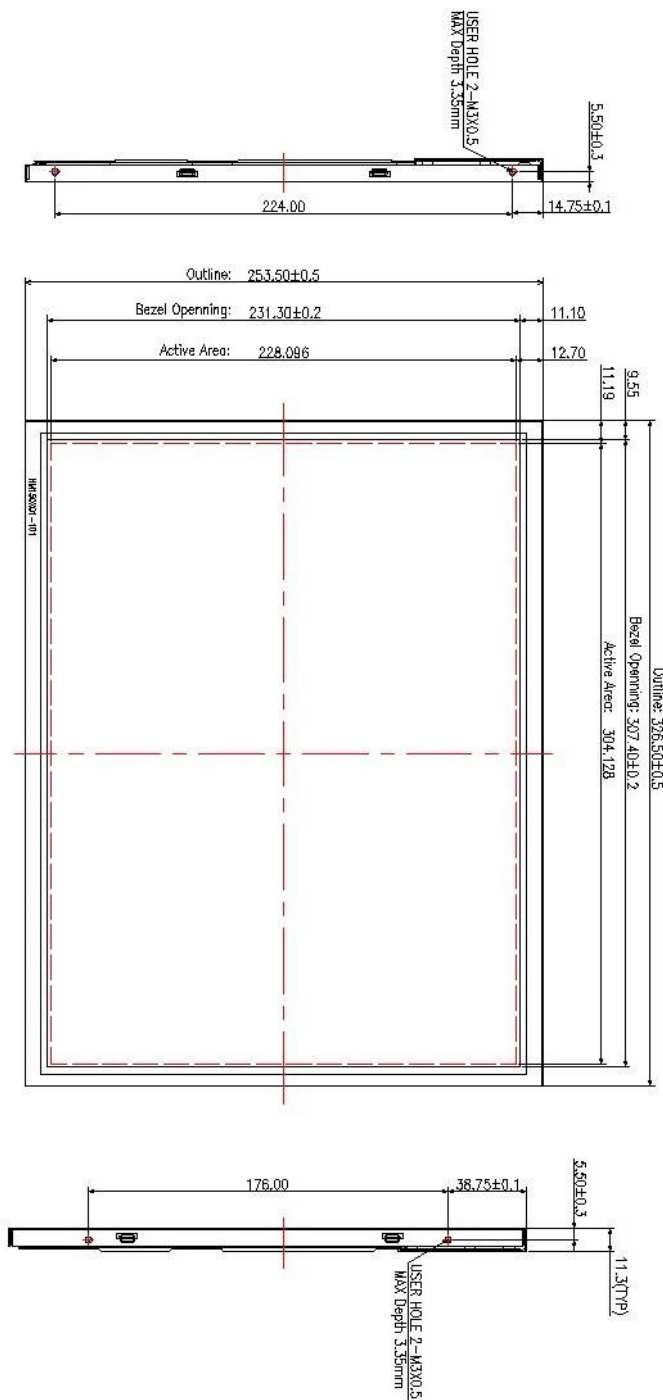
TFT-LCD Module Outline Dimensions (Rear view)
